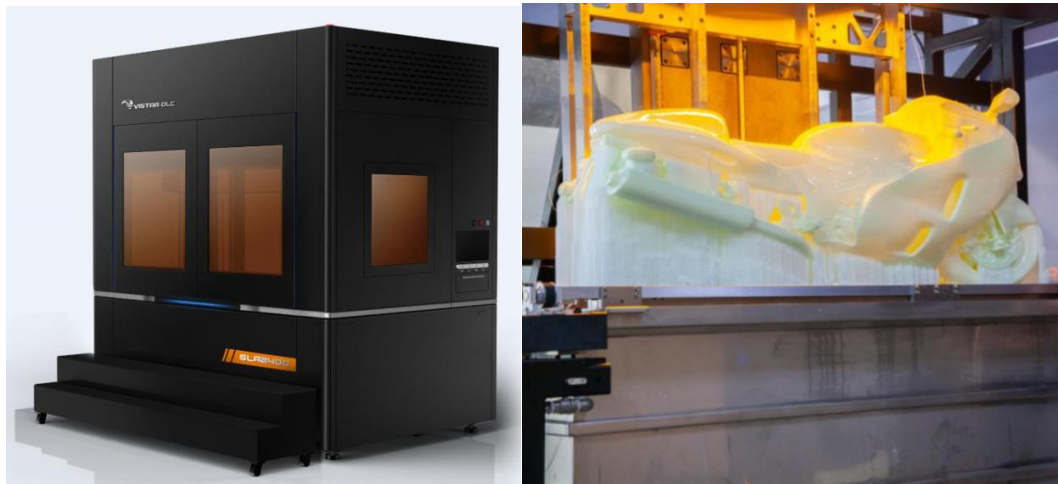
ProtoFab SLA 240 and one-piece motorcycle printed with it [33]
